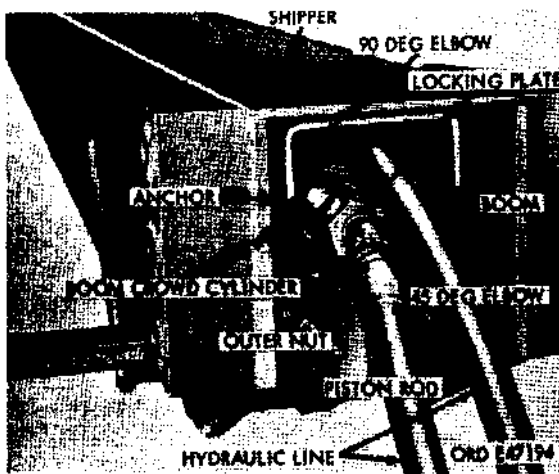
Rear view of boom and shipper assembly with cable drum removed
